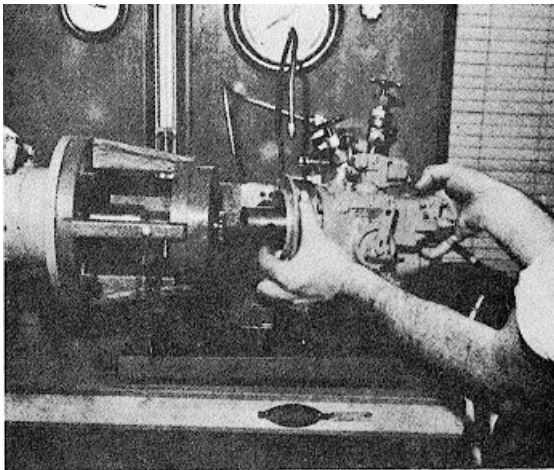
, F5169. Mounting fuel pump with spline drive
